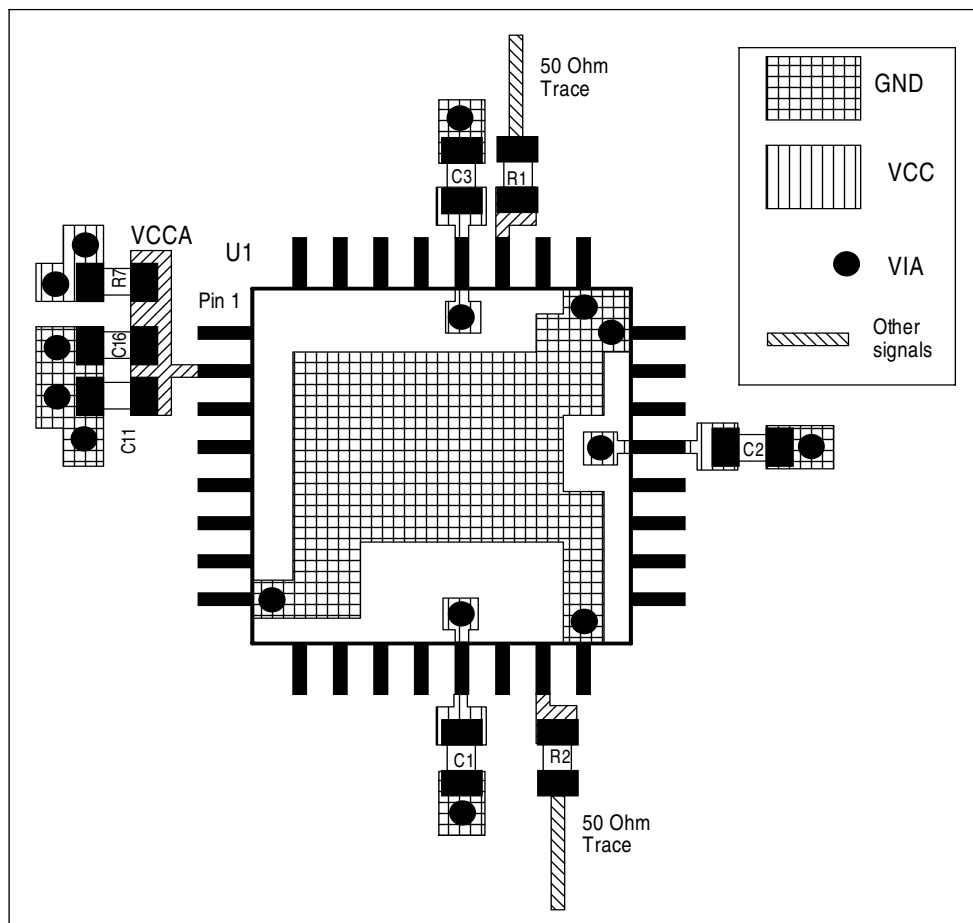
B. PCB BOARD LAYOUT FOR ICS87931I-147
